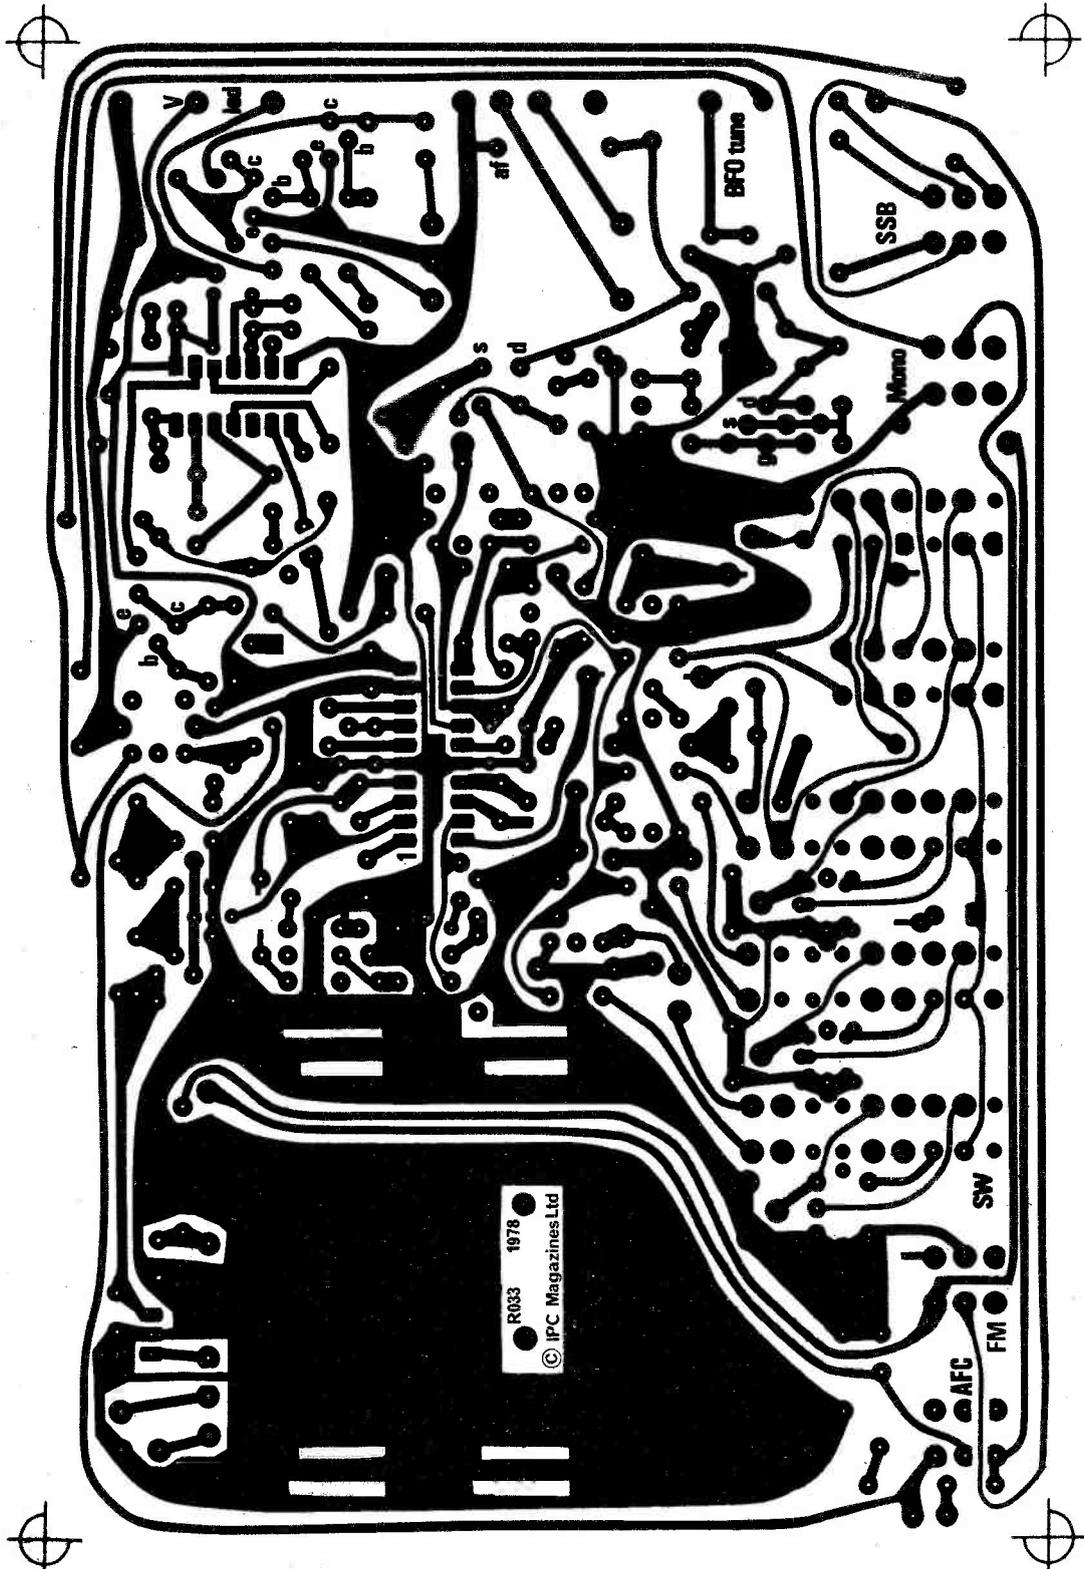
(below) The copper side layout of the p.c.b. (shown full size)
